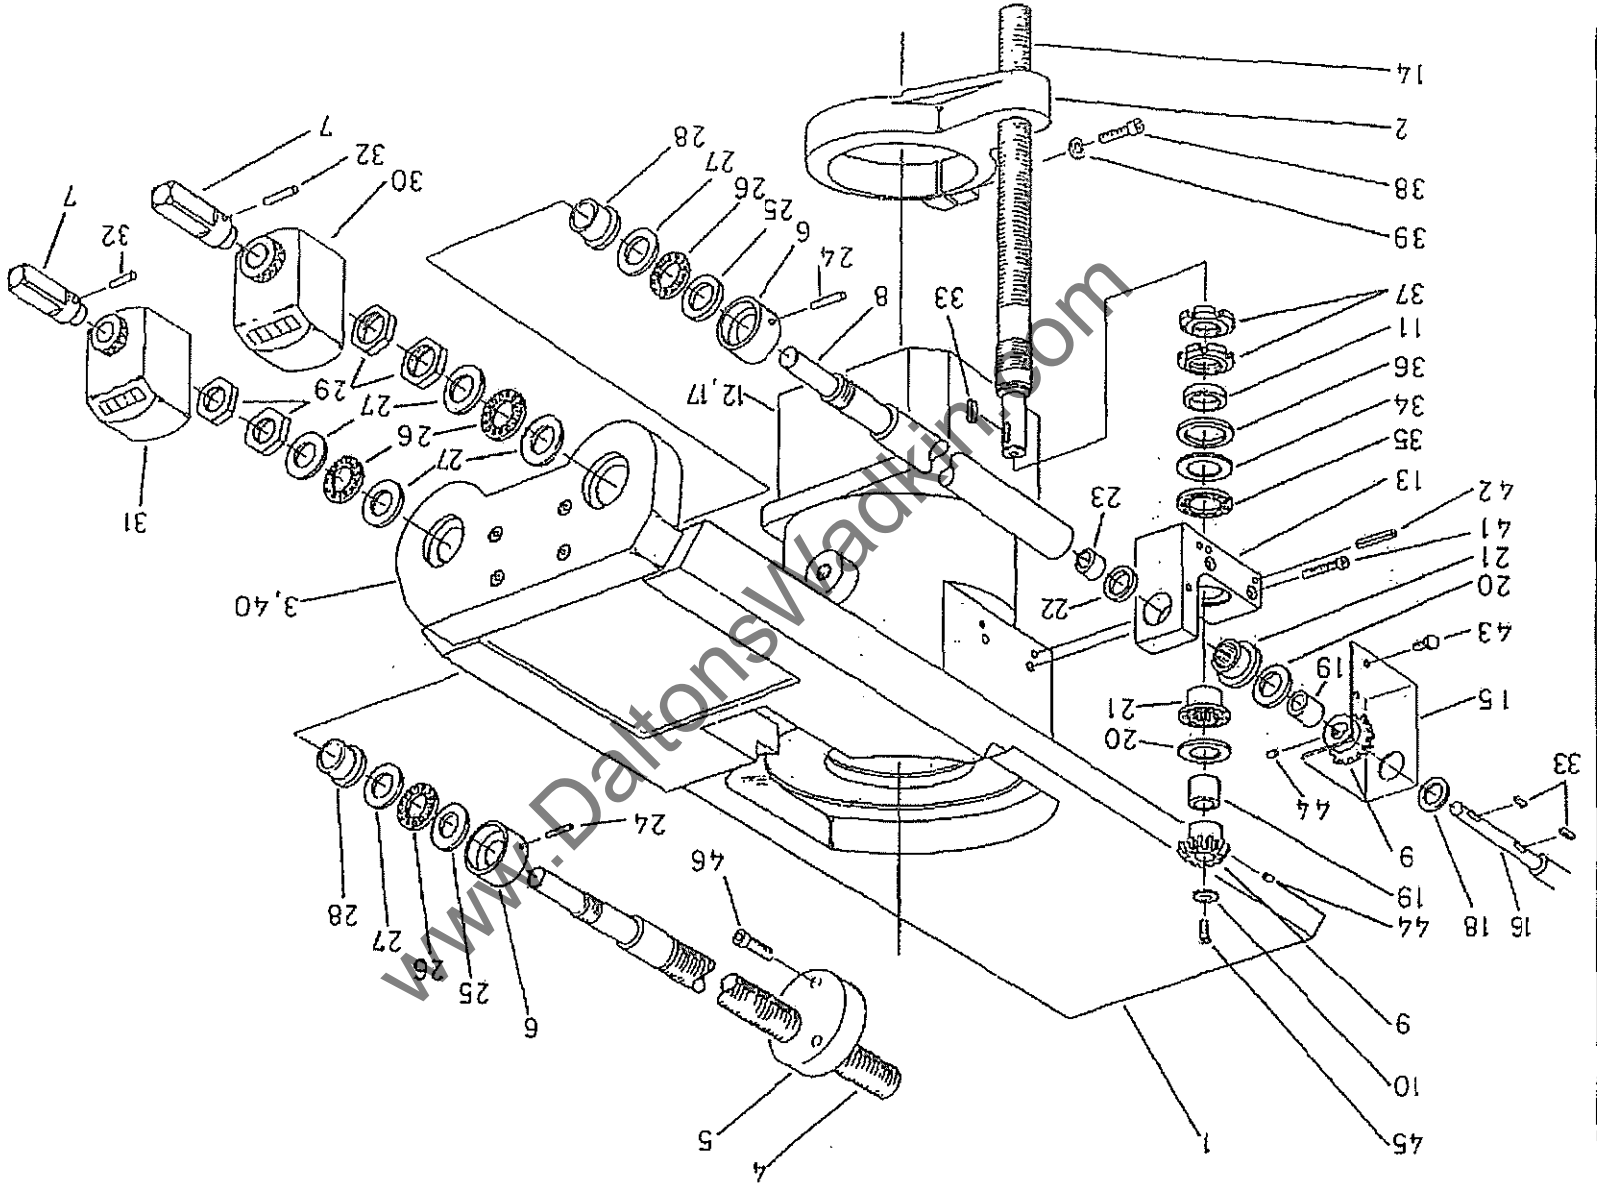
NEAR SIDE HEAD CARRIAGE ADJUSTMENTS
